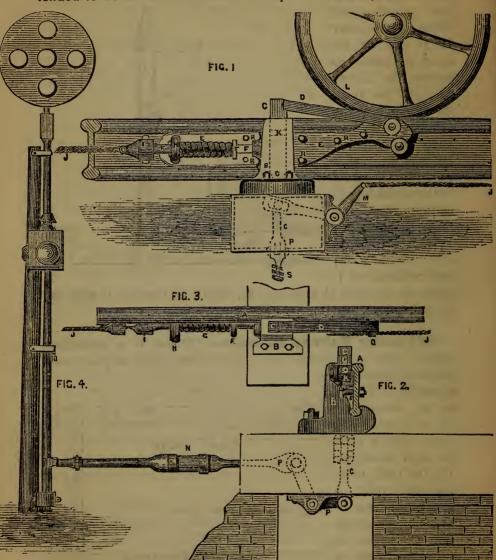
is a front view, showing all ready for the first wheel of the engine or carriage to press it down on the lever D. Fig. 2 is an end view, showing other working parts of the appa-
